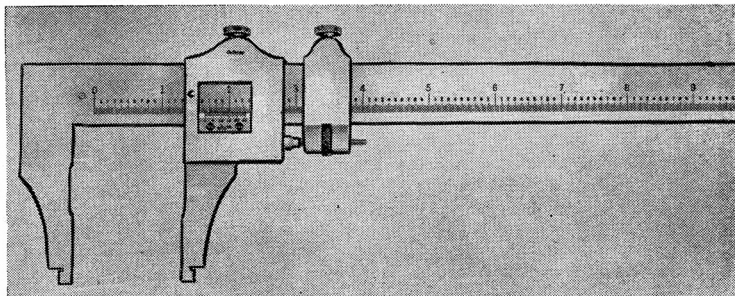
Outside-inside vernier caliper. Tips of jaws used for inside measurements.
